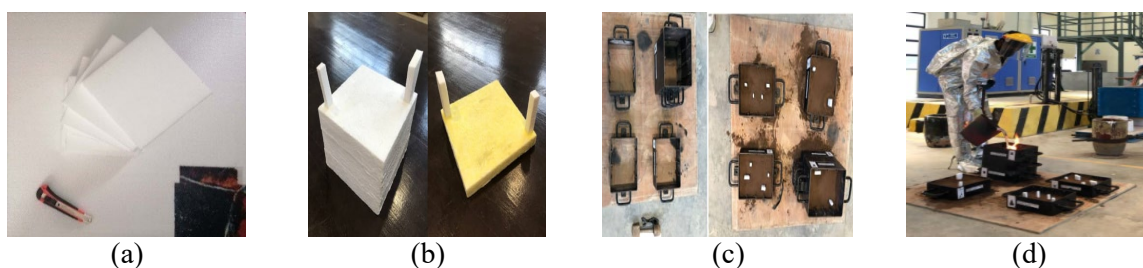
Used of LFC process; (a) Styrofoam cut into desired shape, (b) coating applied, (c) mold filled with green sand and compressed, (d) Molten metal poured through the feed
